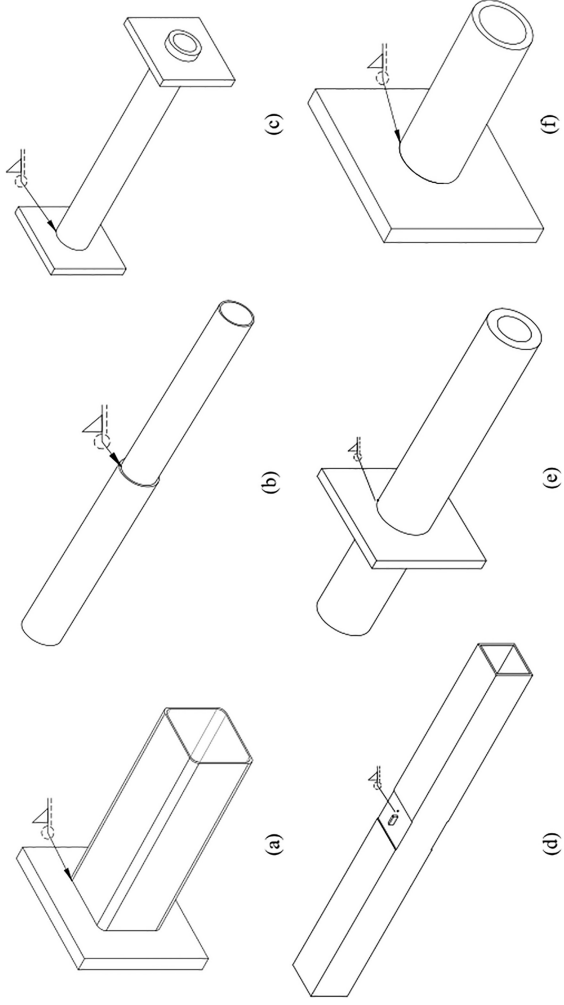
| Geometrical configurations of the investigated welded joints.
